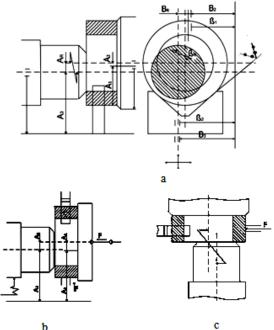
The position the assembled pieces, in the case when you the report 1/d > 1.
